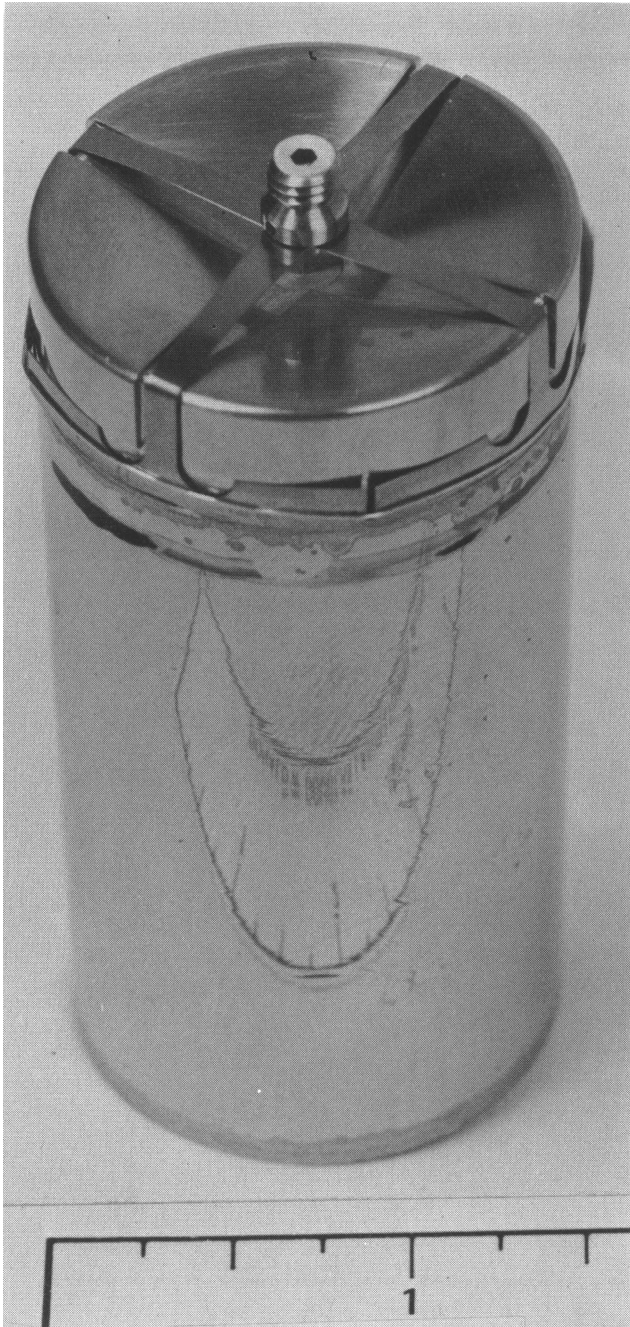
Engine 5 displacer showing hot-end flexure support.
